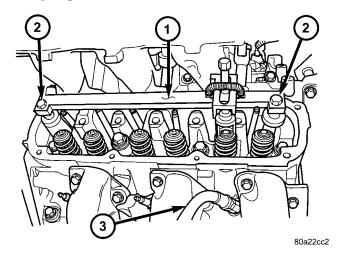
VALVE SPRING - REMOVE/INSTALL (HEAD ON)
